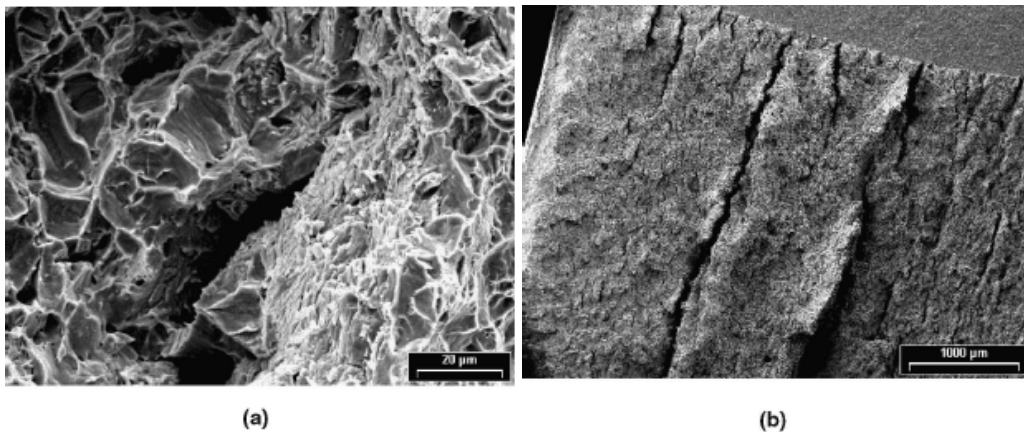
(a) Fracture surface observed in a specimen that fractured by brittle mode. (b) Large longitudinally oriented cracks (Bertolino, G., 2002).
